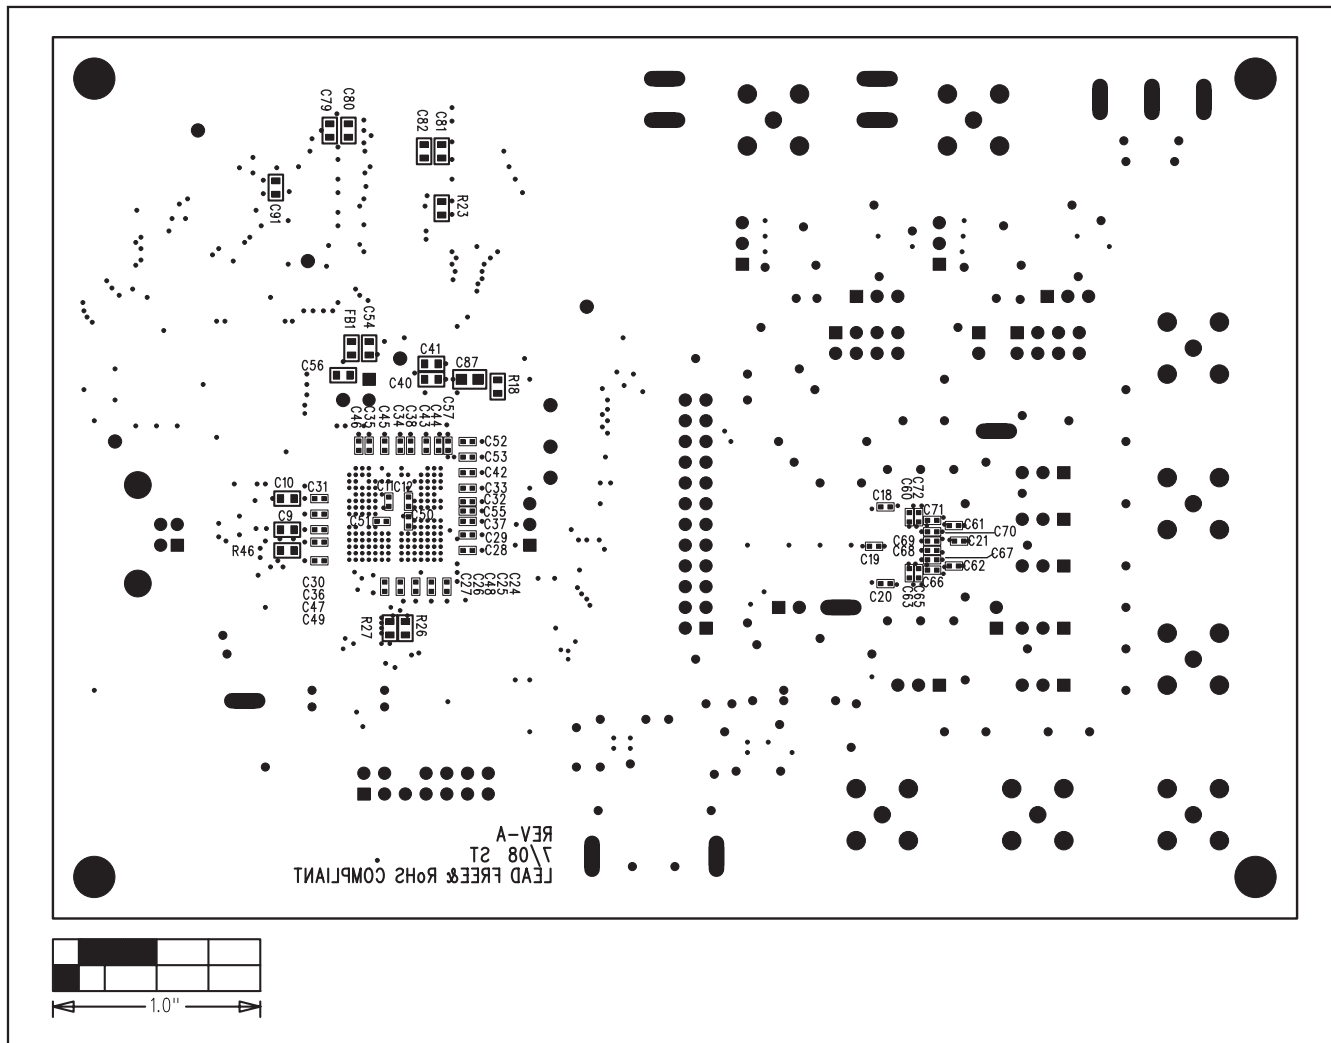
MAX11046 EV Kit Component Placement—Solder Side
